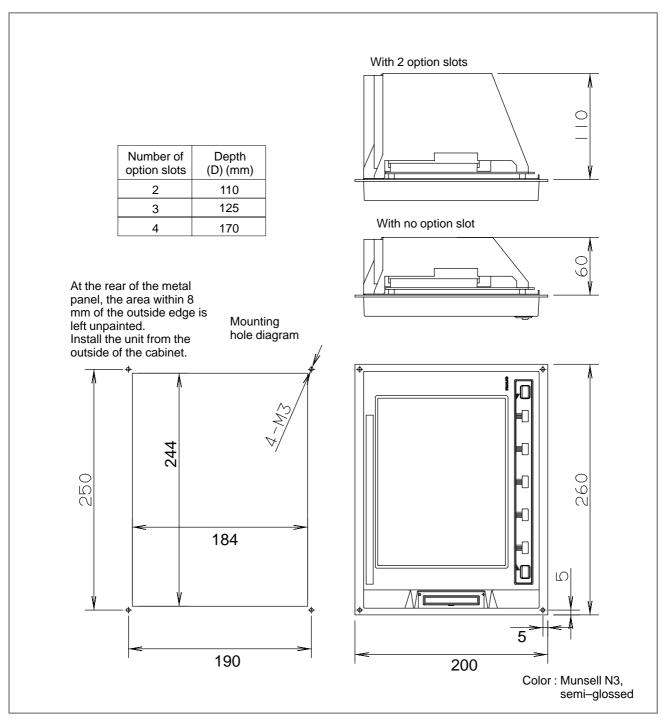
External dimensions of 8.4" LCD-mounted type CNC control unit
